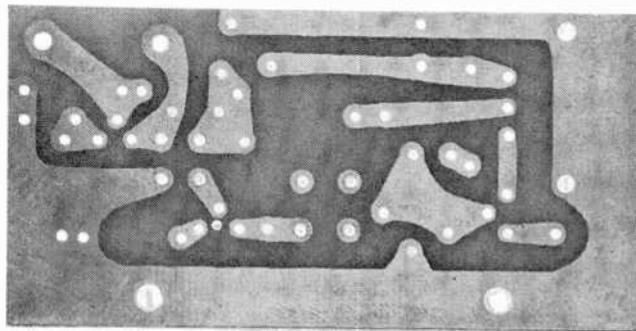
Actual size photograph of printed circuit board will guide you in making your own.
